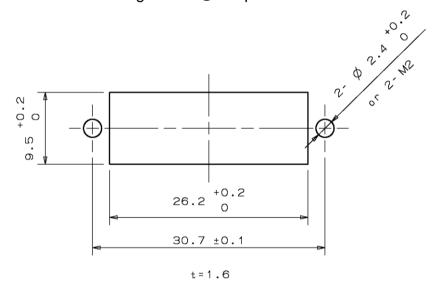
SLCFP-4A4 Series Adaptor (Short Flange Type)
